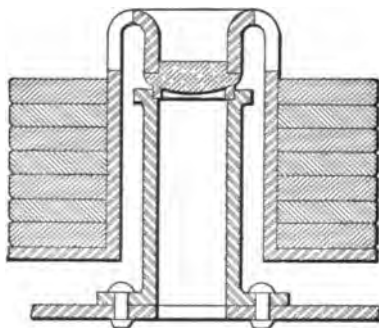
Dead-weight Safety-valve, Coburn Type.
